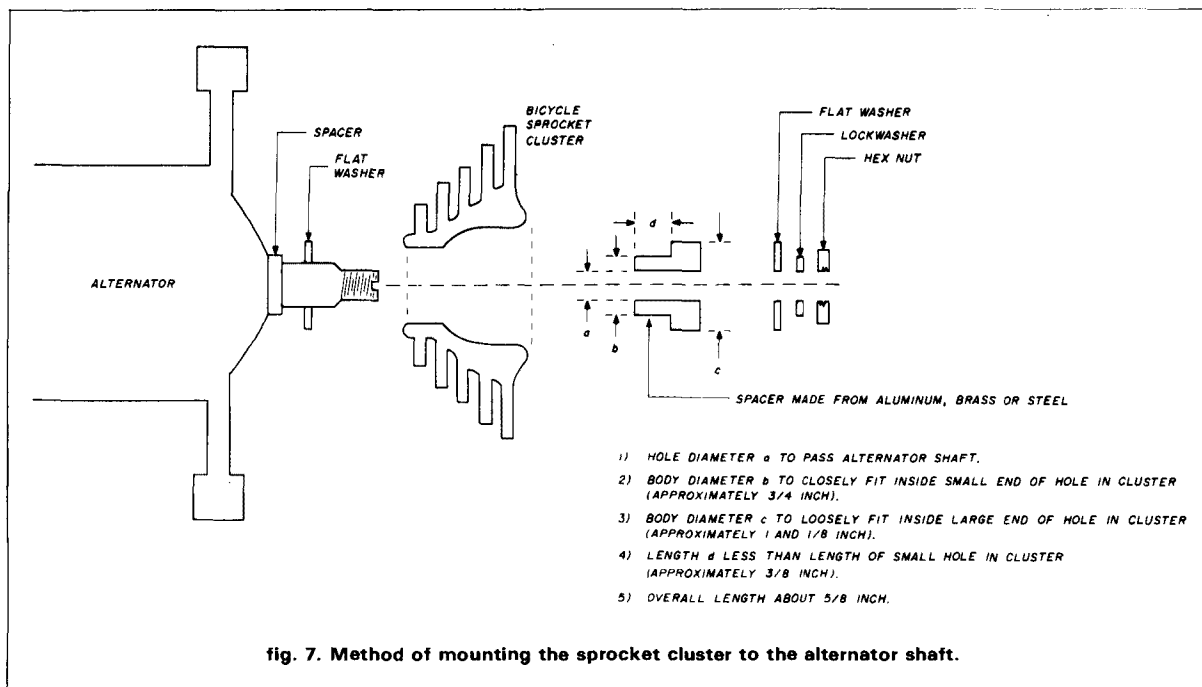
Method of mounting the sprocket cluster to the alternator shaft.
